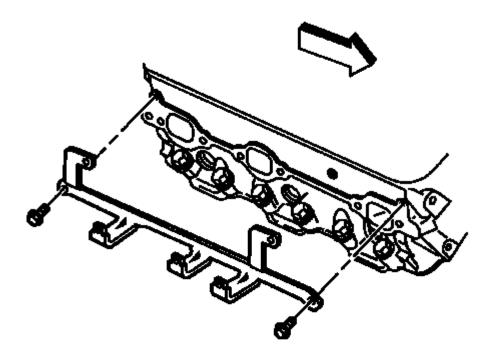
View Of Spark Plug Wire Support Bolt (Right) Courtesy of GENERAL MOTORS CORP.
